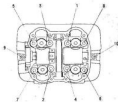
Cylinder head nut & bolt tightening sequence
